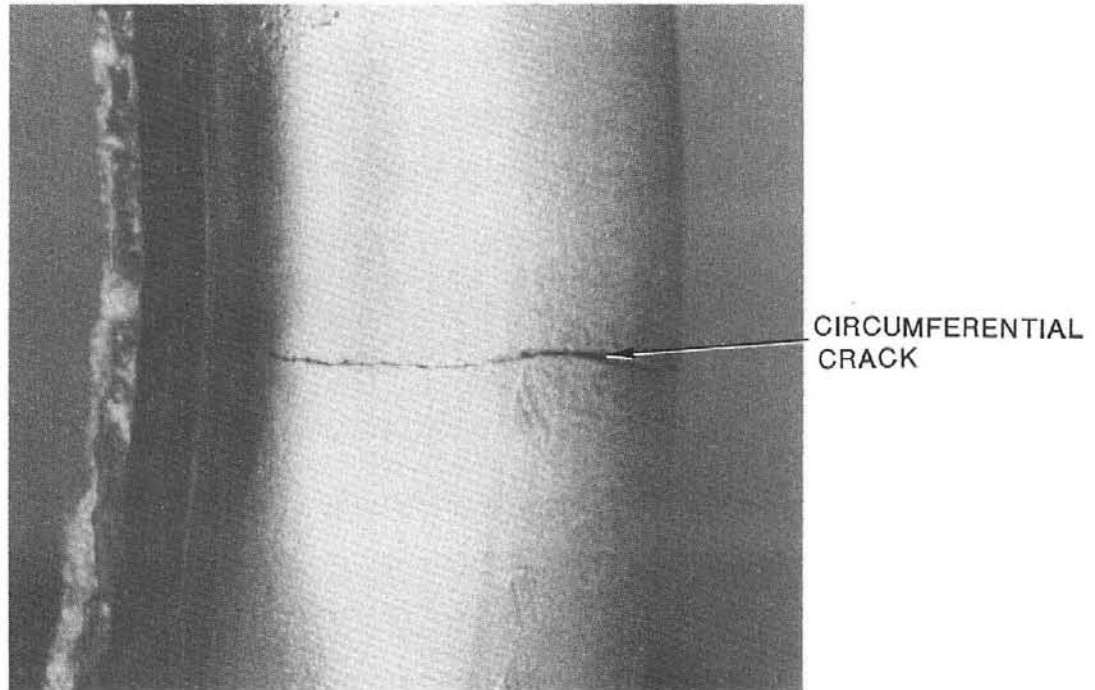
Photograph of the crack in the edge tube bend section removed from a panel. The crack is circumferential around the tube.
